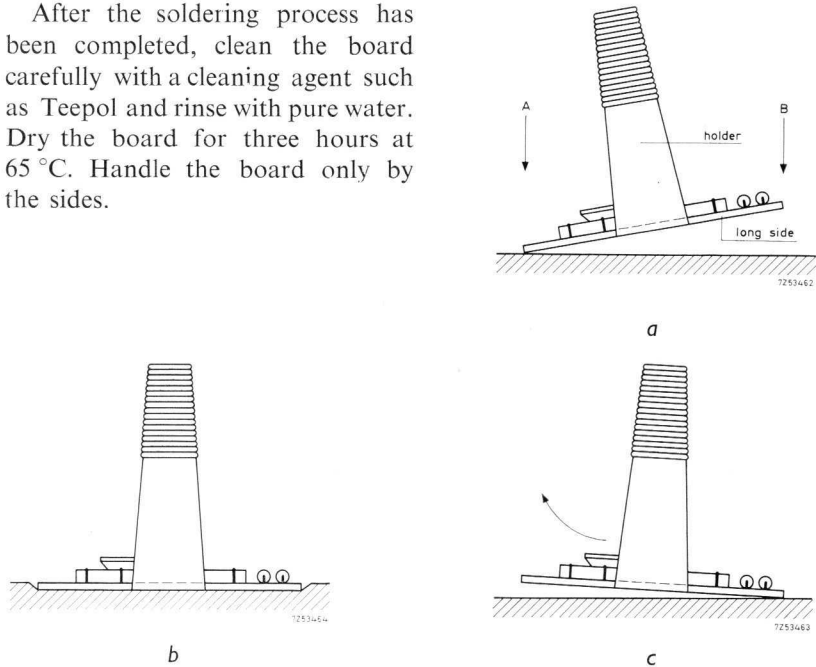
(a) When placing the board onto the solder surface, be careful not to make a sliding movement but to lower the board at B as soon as it touches the surface at A. The gold-plated terminals must always touch first. (b) The board will tend to warp while heating up, therefore apply some pressure on the board so that it touches the surface completely and the top side is flush with the solder surface. Solder in this position for 5 seconds. (c) The soldering operation being finished, withdraw the board from the bath with a sliding movement to remove excess solder.
